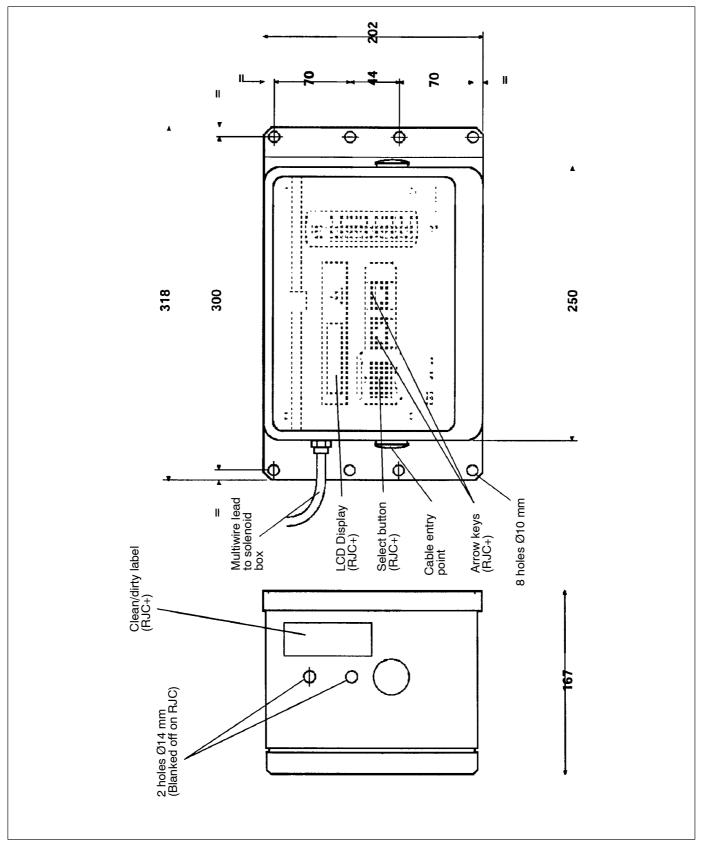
RJC and RJC + controller - Dimensions common to all controllers
